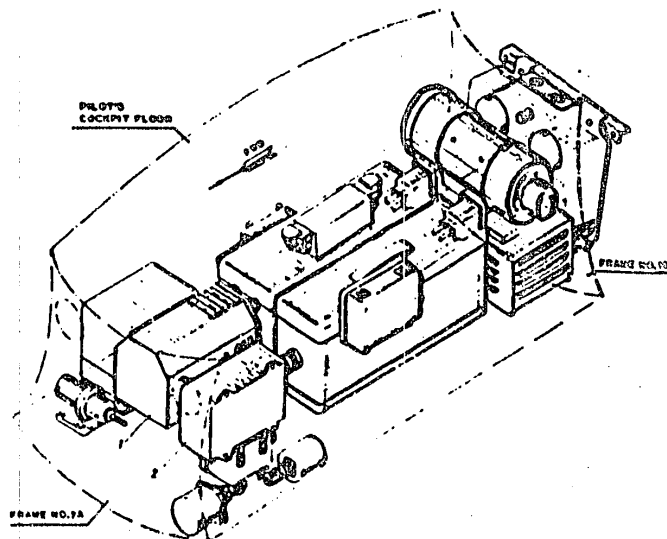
LAYOUT OF ELECTRIC EQUIPMENT UNITS UNDER COCKPIT FLOOR
